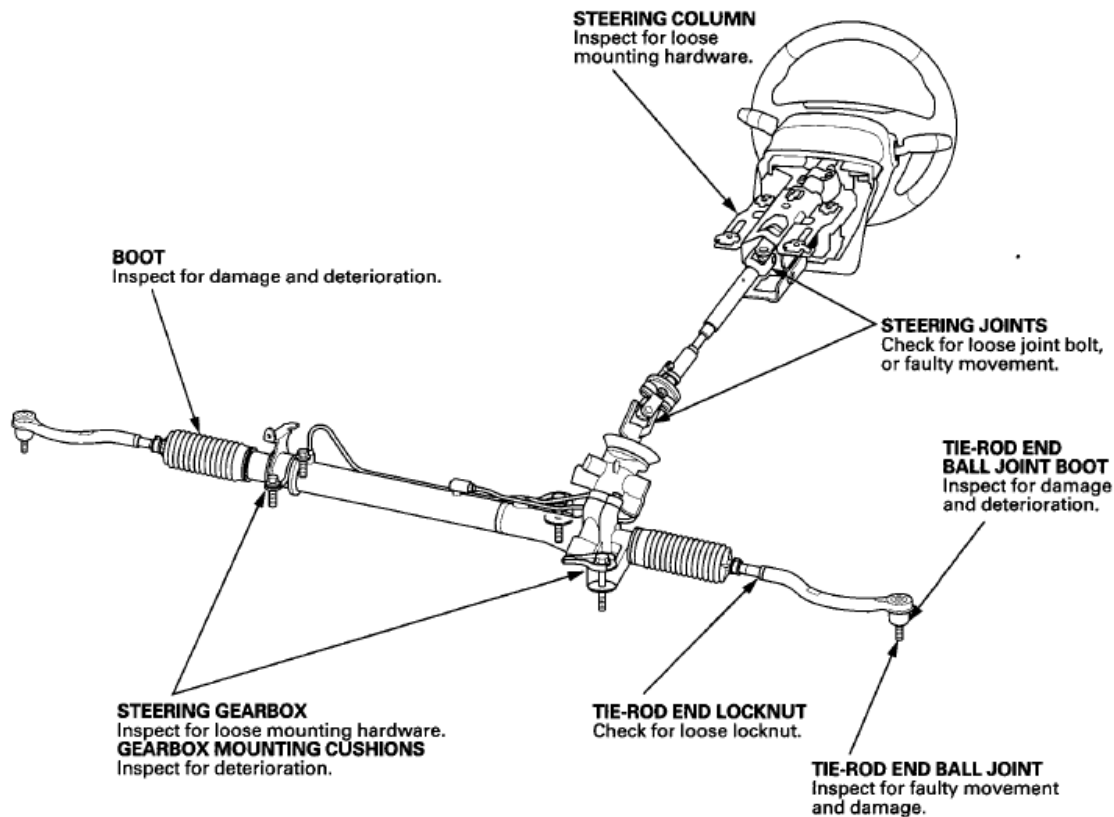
Inspecting Steering Linkage And Gearbox
